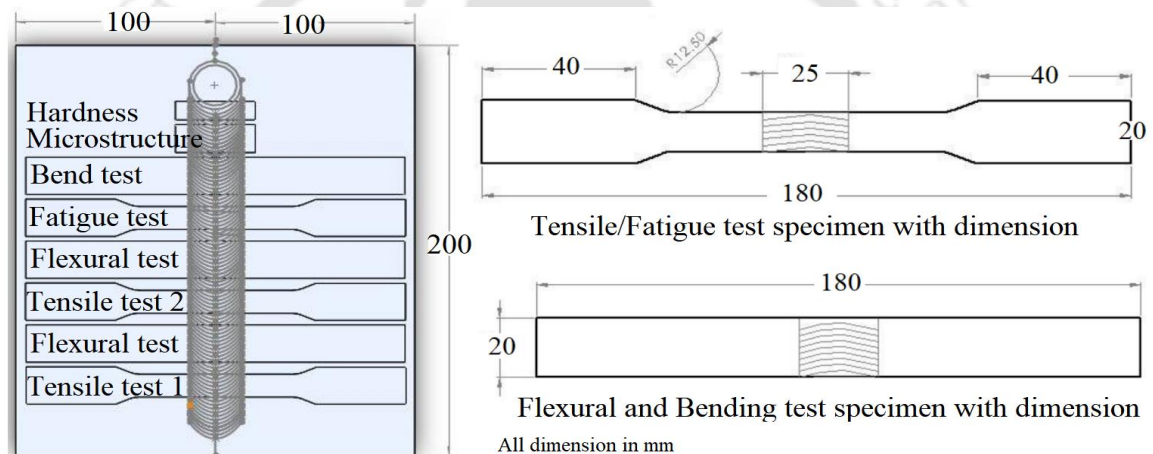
Photographs of different test specimens extracted from the welded plates.
